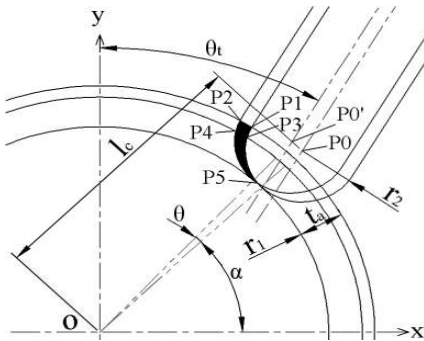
Schematic of sectional cutting chip area in the ball endmilling with straight flute contacted
